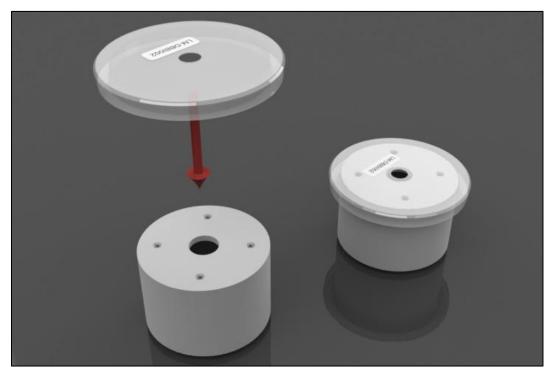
Magnetic clamp is assembled with centering aligner prior to attachment to the bag.
